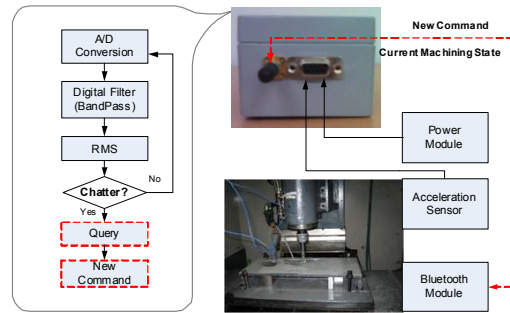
The Interaction between the Embeddable Device and the Machine Tool
